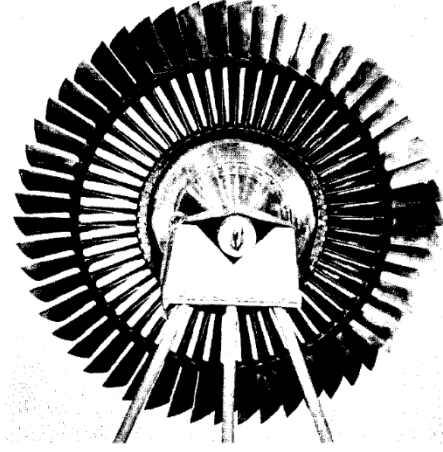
FRONT VIEW OF CJ805-21 FAN ROTOR ASSEMBLY
